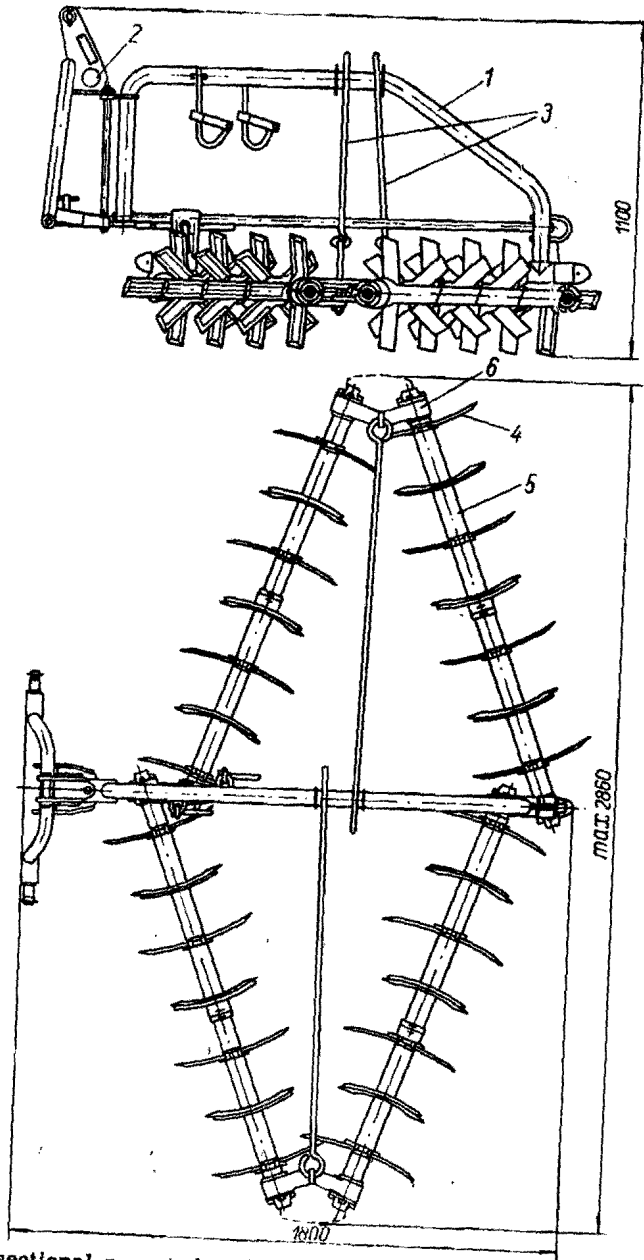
Four-sectional mounted paddle harrow: 1 — frame; 2 — mounting column; 3 — hangers; 4 — paddle; 5 — distance sleeve; 6 — shaft holder.
